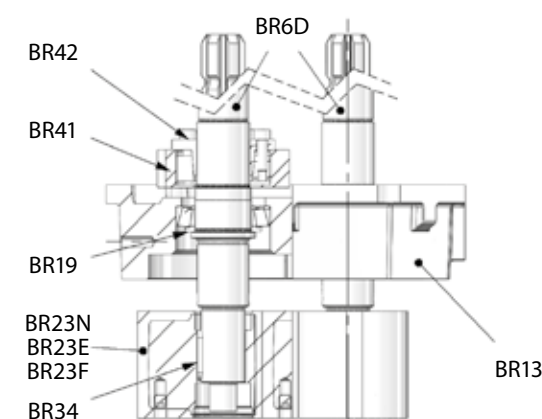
Vertical assembly of the gearcase (step 1).
